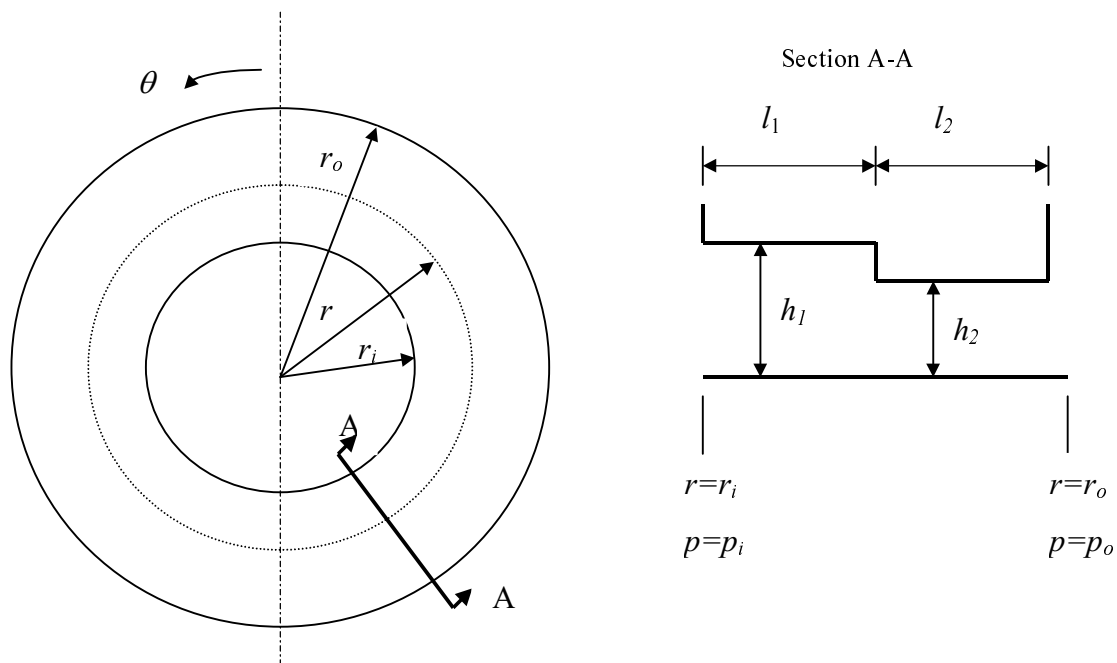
Schematic view of a flat mechanical face seal with pressure dam.
